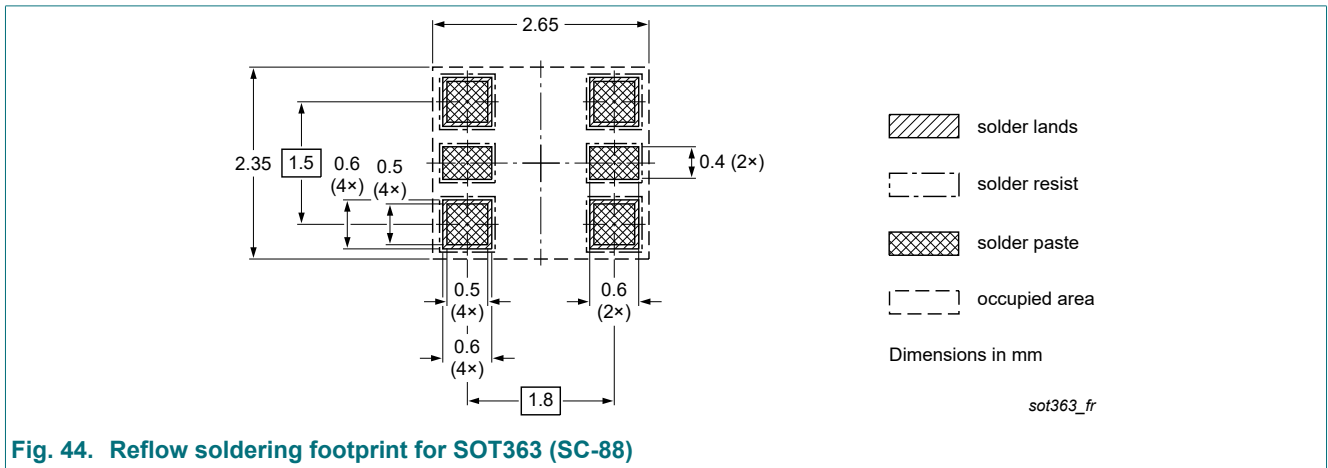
Reflow soldering footprint for SOT363 (SC-88)
